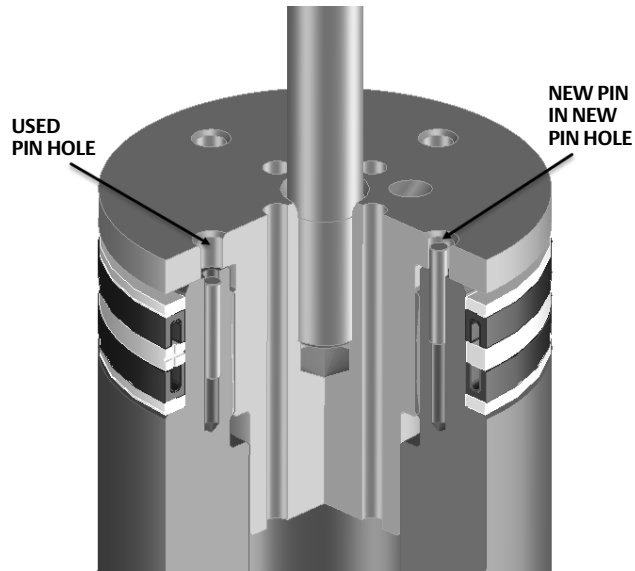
CCV NPS 2 and 3 Assembly - Insert of Plug Stem Seal Assembly through the Top of the Seat Ring Retainer
